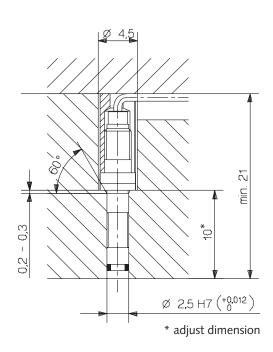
Installation with spacer sleeve (Type 6464A1)
